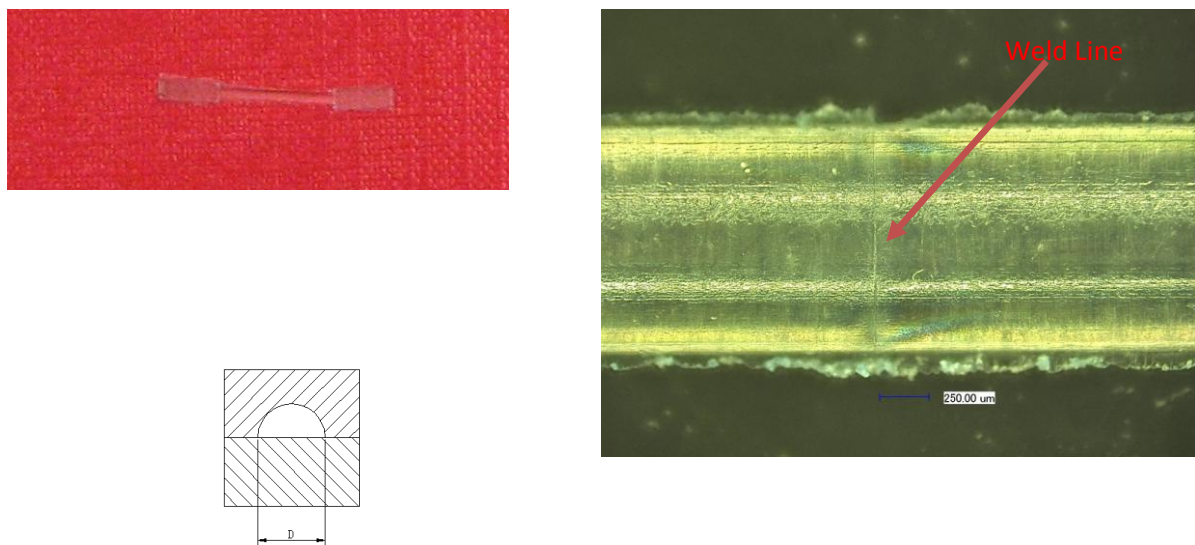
Micro tensile specimen with Semi circle cross section and its weld line
